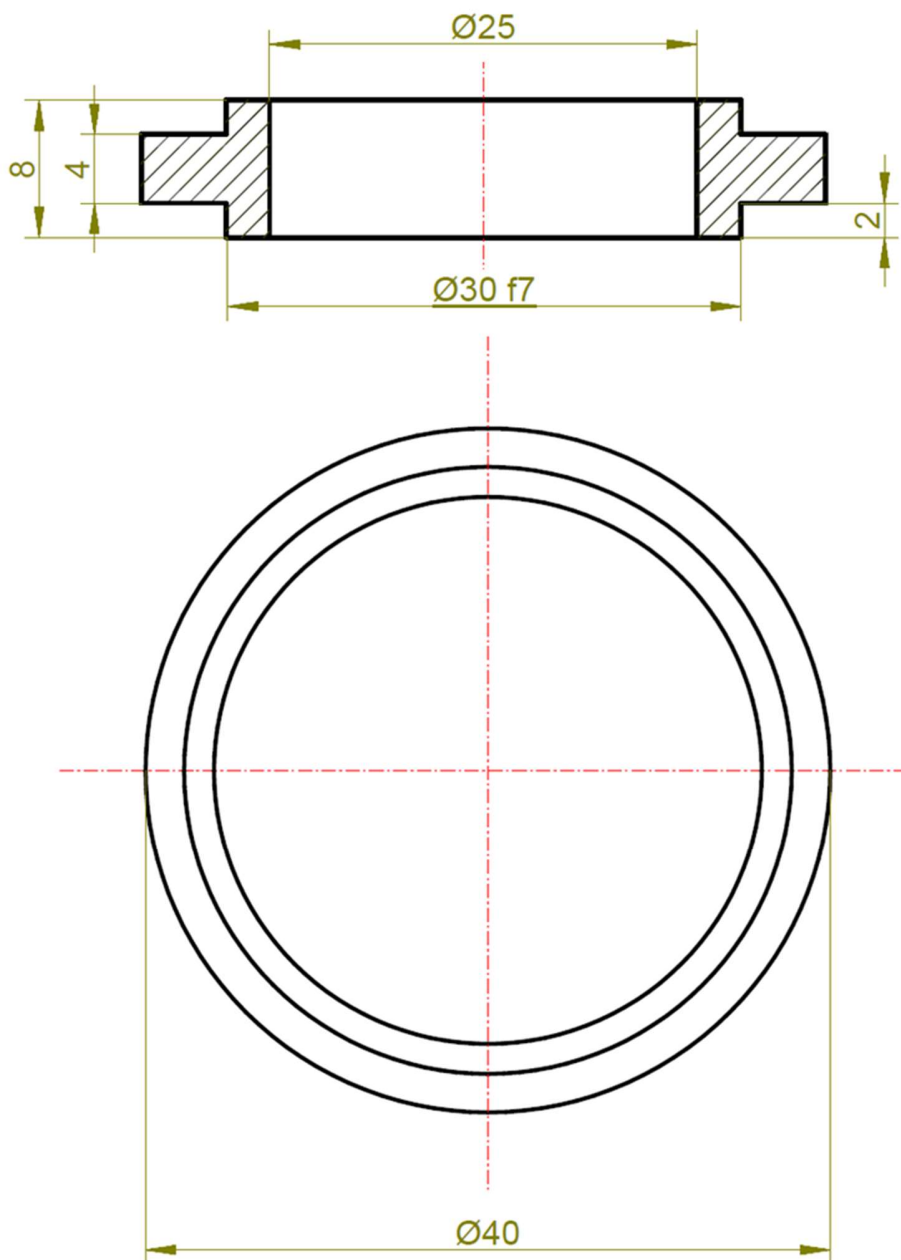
Technical drawing of the insulation ring. The diameter 30 mm f7 indicates a technical fit for the machinable ceramic material (Macor™) inside the drift ring electrode. The fit is approximately chosen so that material is not affected when the materials are expanding due to temperature increase. All dimensions in mm. Material: Macor™
